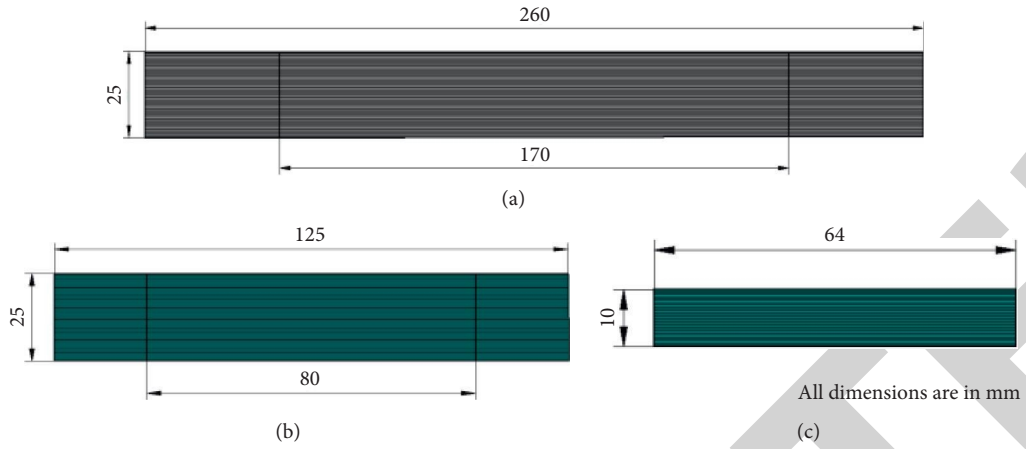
Specimen dimensions as per standards. (a) Tensile test specimen. (b) Flexural test specimen. (c) Impact test specimen.
